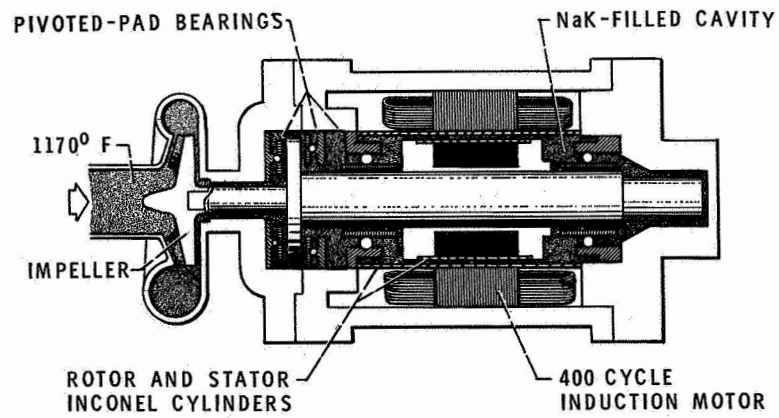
SNAP-8 NaK pump-motor assembly.
